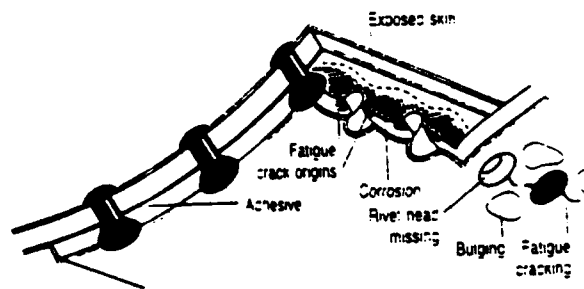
Exfoliation corrosion, which shows as bulges around rivet heads, can propagate into fatigue cracks.
